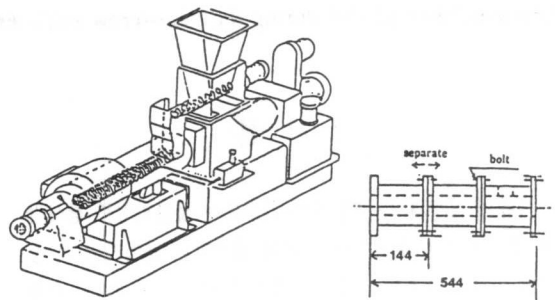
Laboratory twin-screw extruder and the barrel structure.
